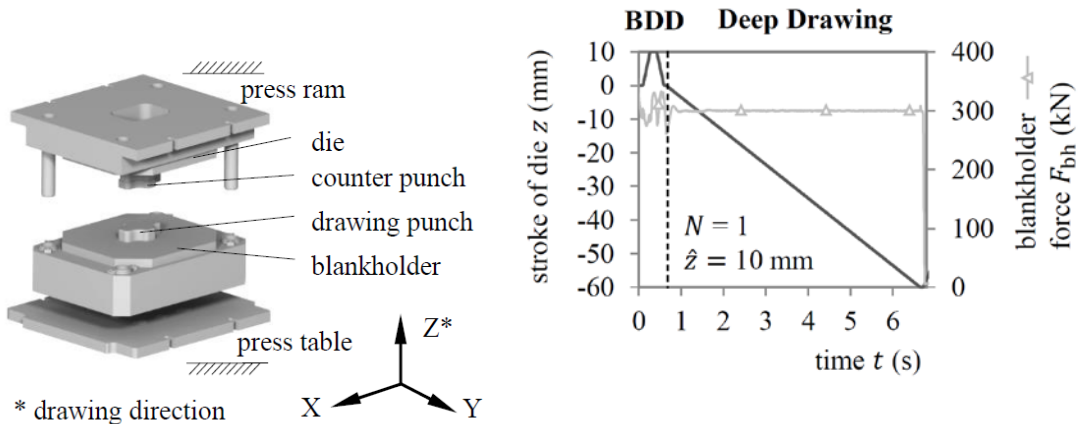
(a) Tool step for bidirectional deep drawing [5]
